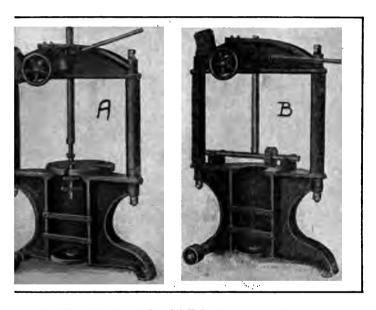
Showing Construction of Arbor Presses and Shaft Straigh Machines.
